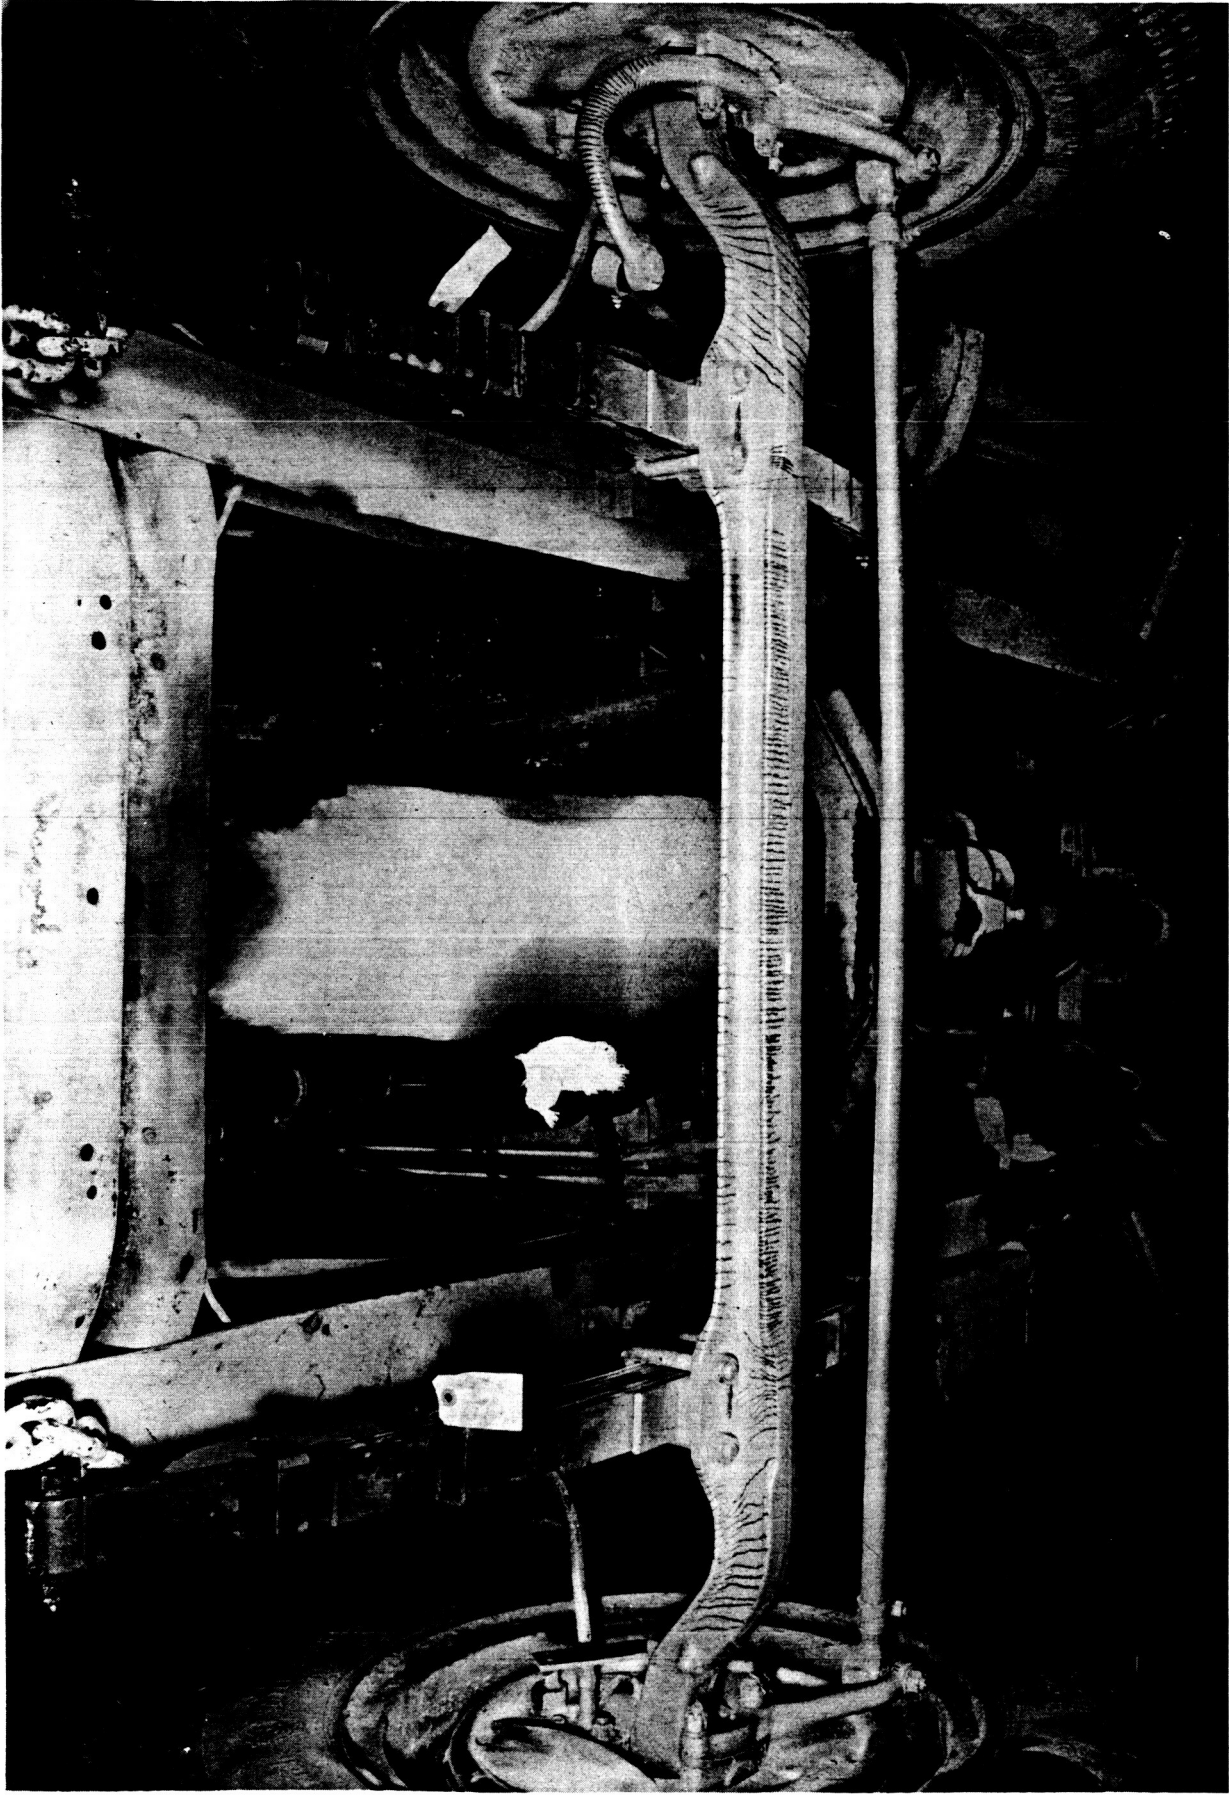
Stresscoat Brittle Lacquer on Front Axle to Determine Bending Stress During Braking. Cracks Have Been Marked with Grease Pencil.
